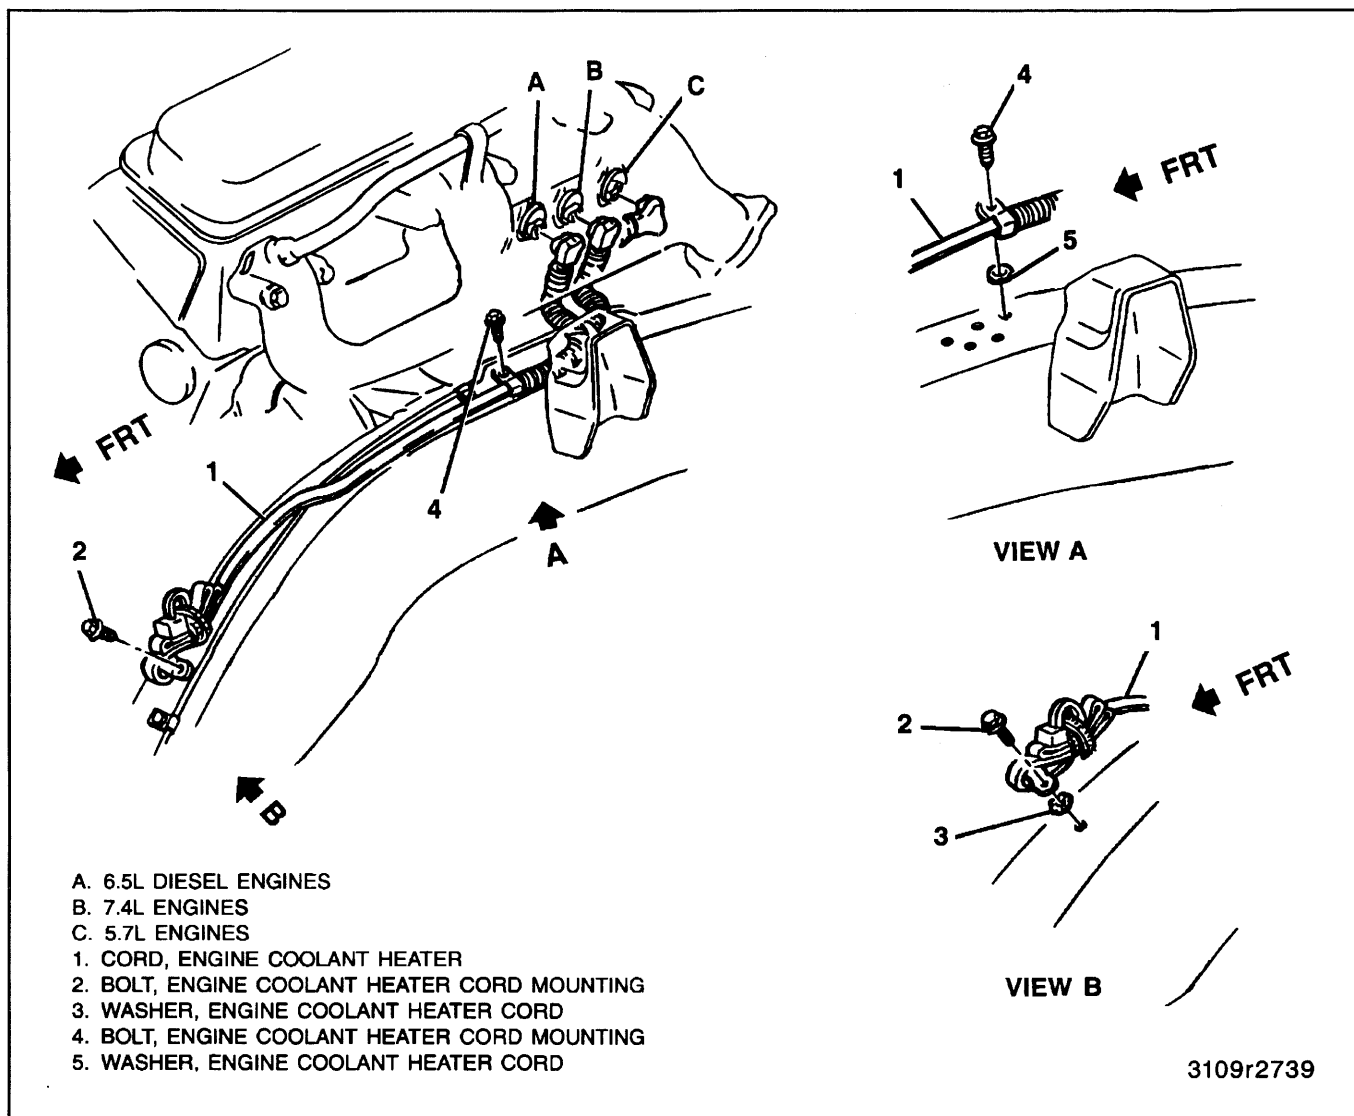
Engine Coolant Heater Cord Routing (Two-Wheel Drive - 1 Ton Models)
